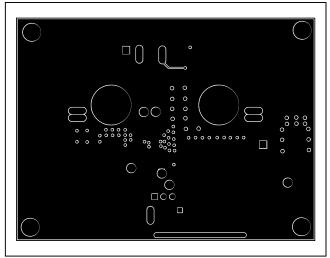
MAX15090 EV Kit PCB Layout—Solder Side
